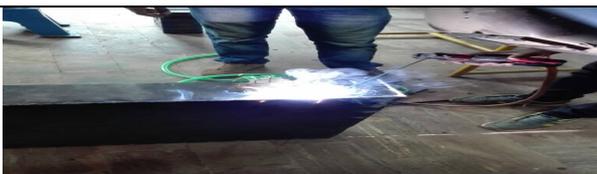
BASE PLATE OF SOLAR COLLECTOR
